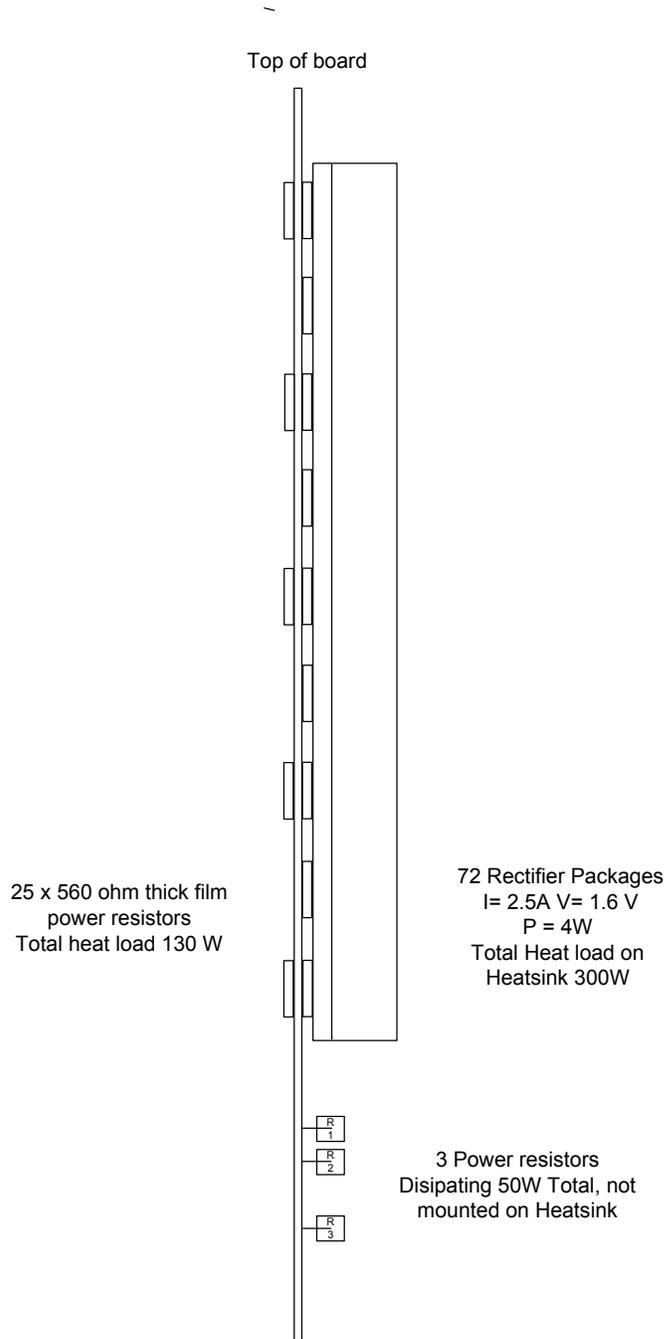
Thermal Baseline Board (Cross-Sectional View)
